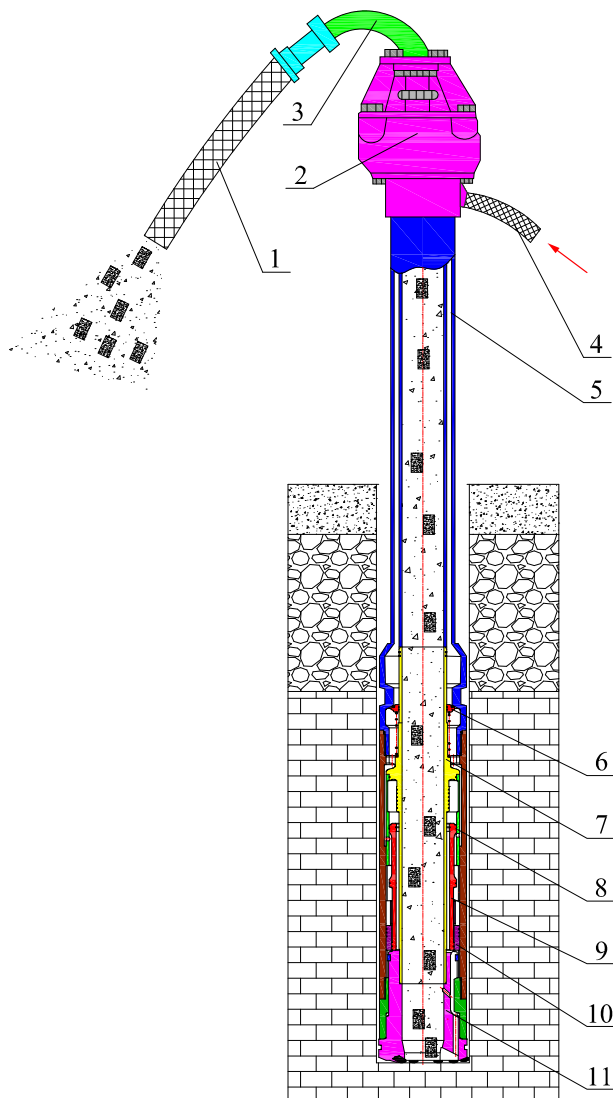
Schematic of RC-DTH air hammer drilling system. 1: flexible discharging hose; 2: dual-wall swivel; 3: goose neck tube; 4: flexible air input tube; 5: dual-wall drill pipe; 6: check valve; 7: centre tube; 8: inner casing; 9: piston; 10: spacer bush; and 11: reverse circulation drill bit.
